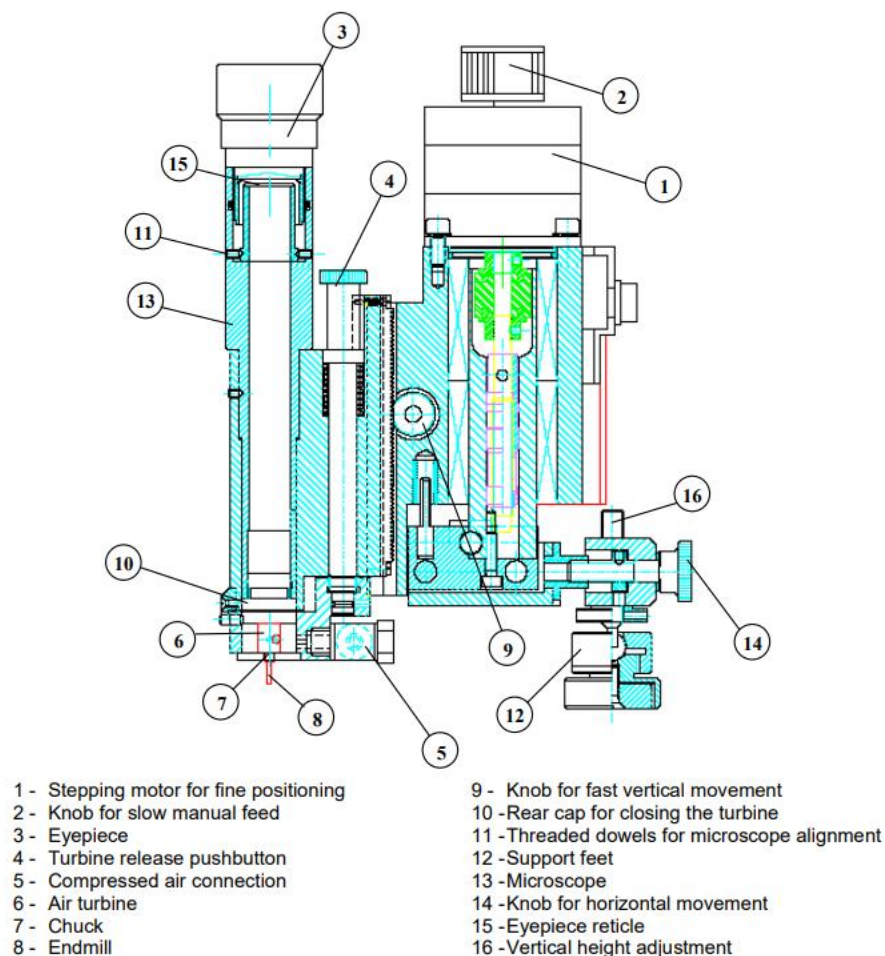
Hole drilling apparatus MTS 3000 - SINT Technology
